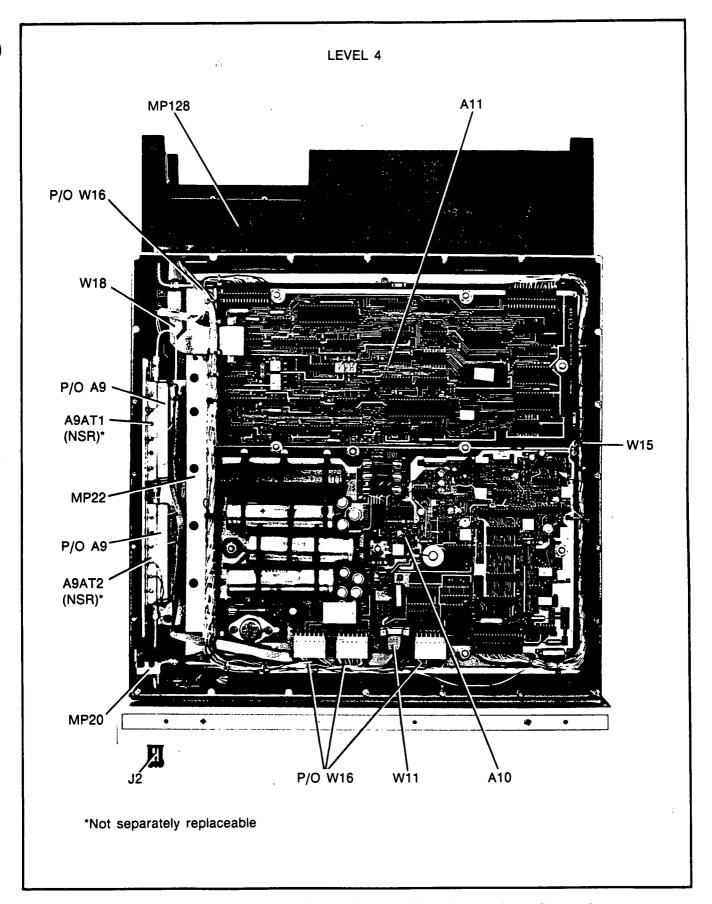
(2425A to 2509A). Bottom Internal View; Bottom Cover Removed
